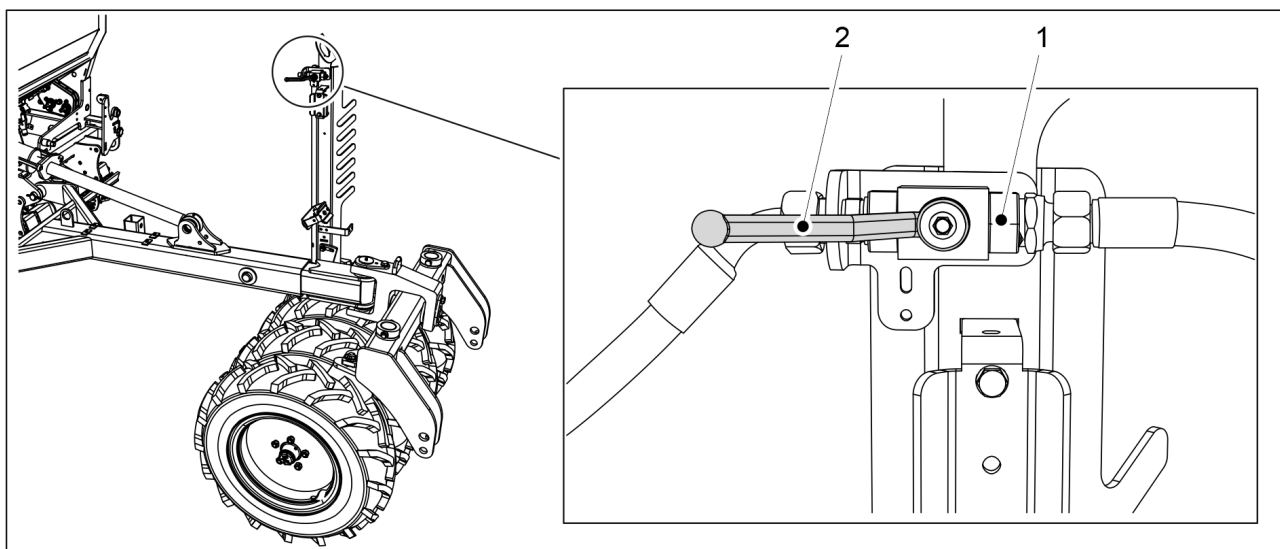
99. Opening the lifting circuit ball valve
